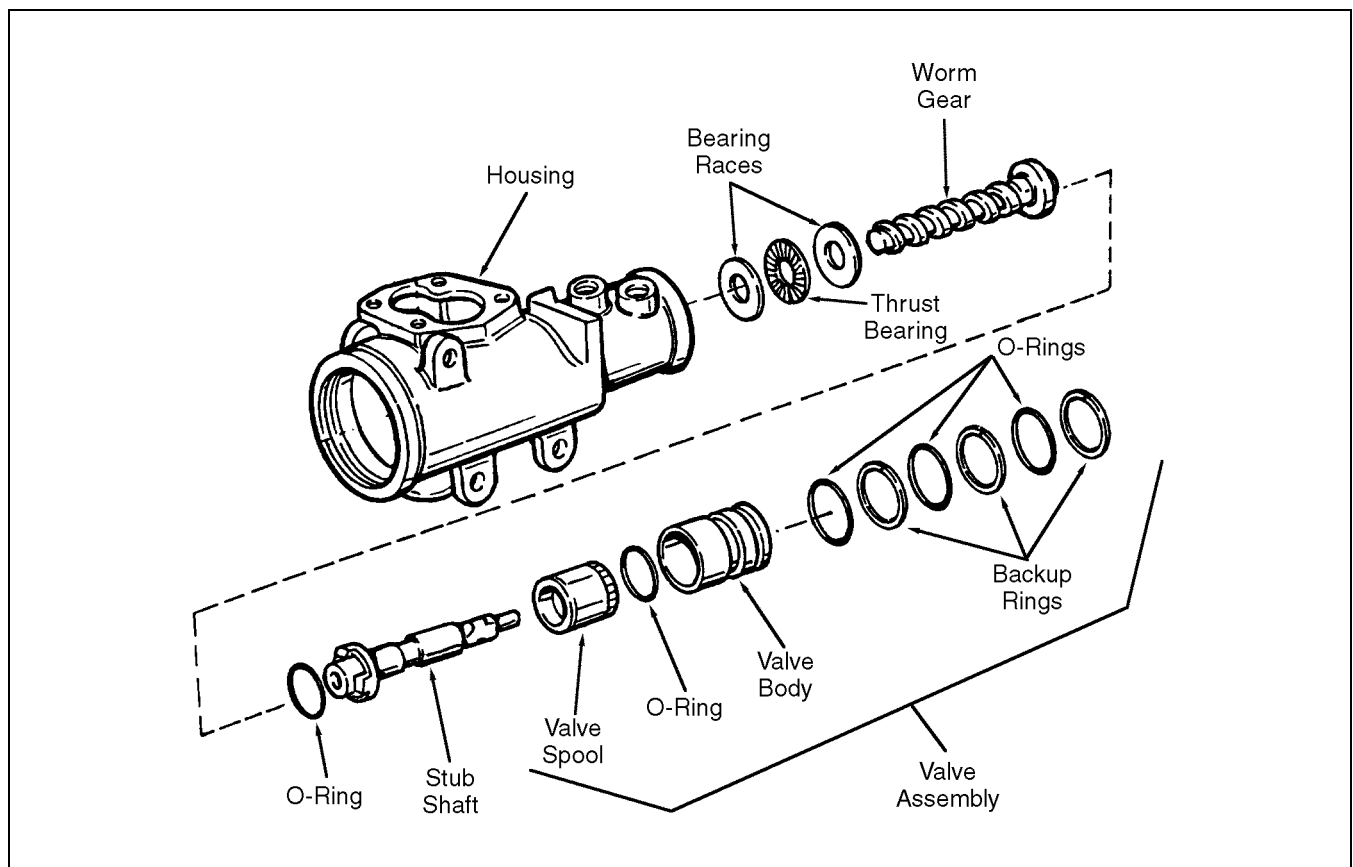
D-7. Valve, Thrust Bearings and Worm Gear
